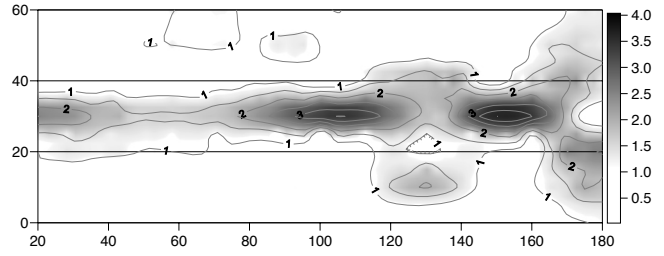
Magnetogram  $m - H_{n,z}$  of joint A, indications: 90 ~ 120 mm - SCZ, 140 ~ 170 mm - SCZ coincides with the location of the occurrence of the defects of the weld seam [32]
